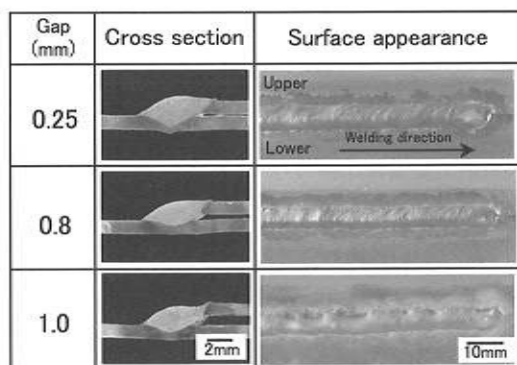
Macrostructure of cross section and surface appearance of weld bead at torch aiming position of lower 0 mm.
